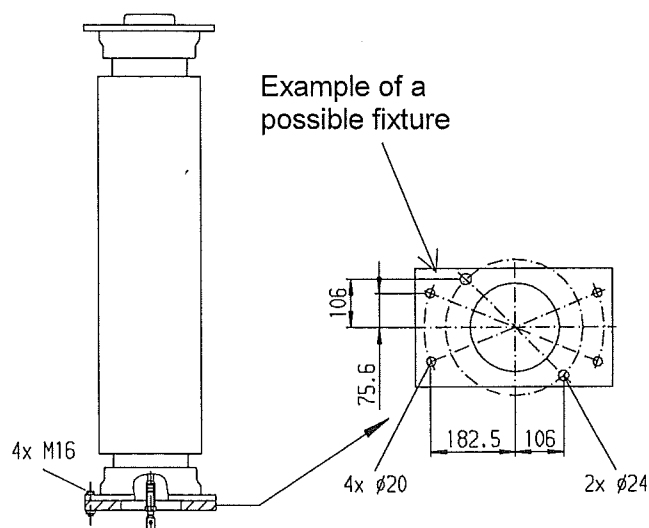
c: Securing the interrupter chamber for disassembly
